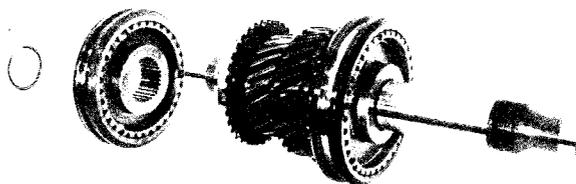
Installing clutch assembly (3rd & 4th)
